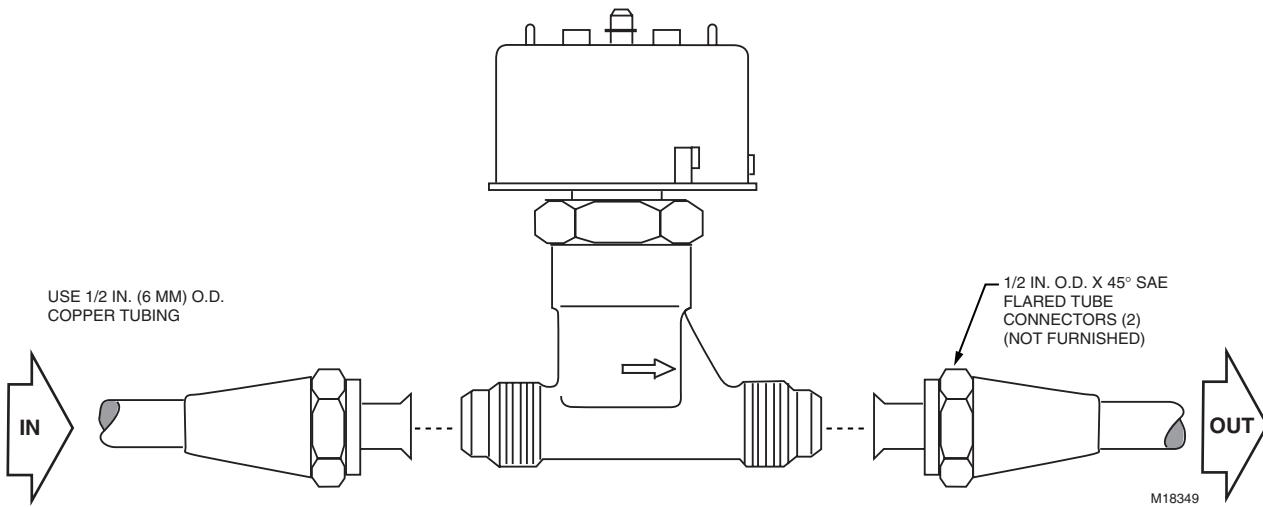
VP527A connectors and copper tubing dimensions in. (mm).
